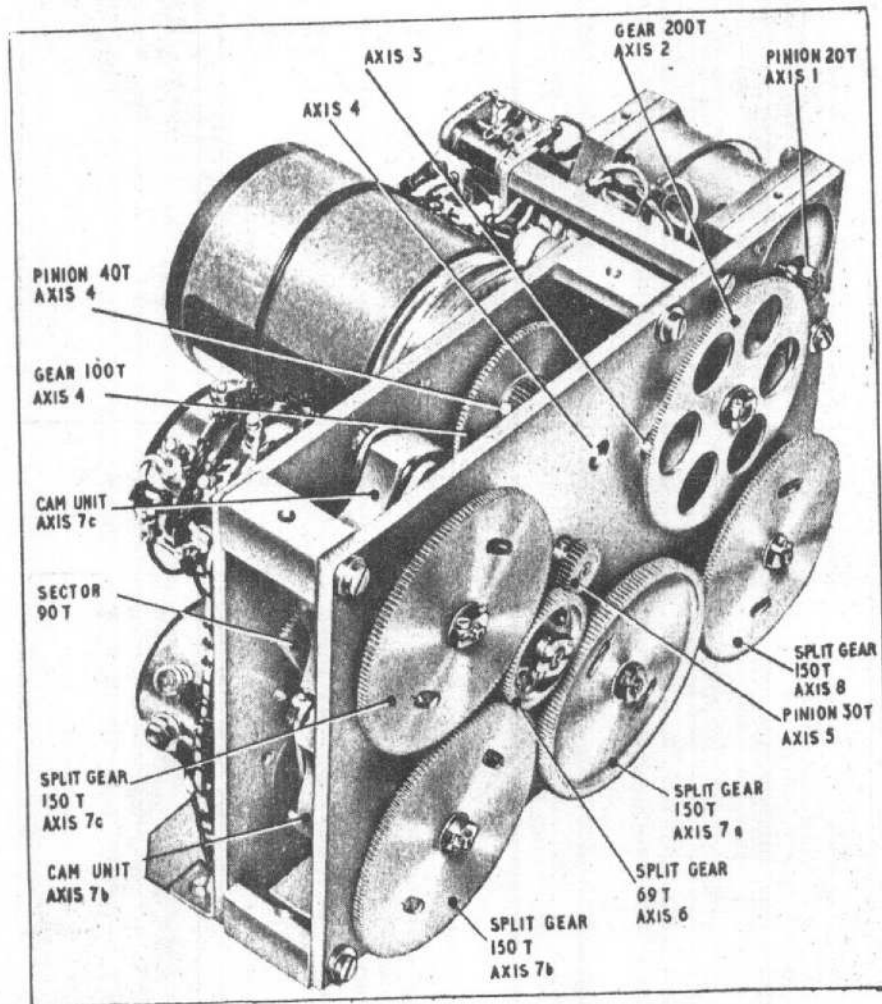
Log Mach number gearbox assembly (G1)—view B (pre-mod. ADS/104)
